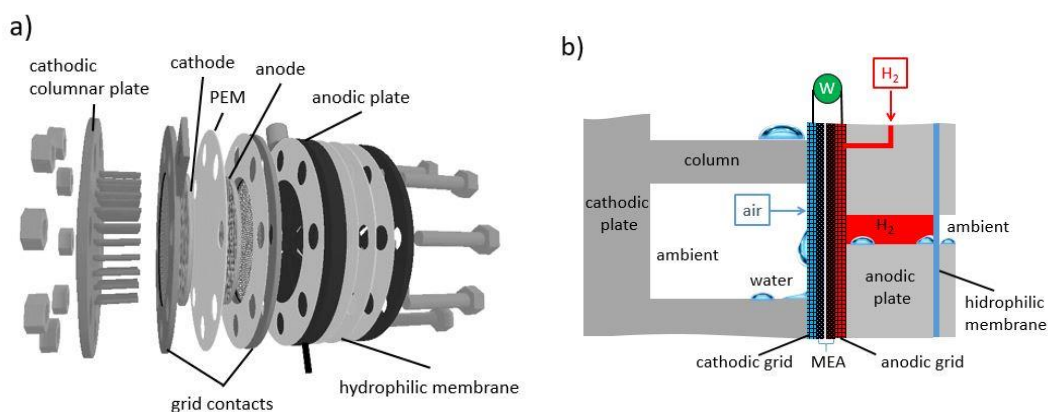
a) Exploded view of the passive PEMFC components; b) scheme of the passive operation.
